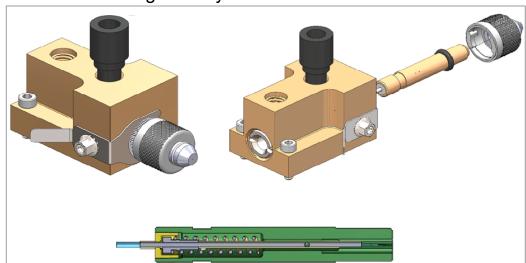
Diagram of the new sprayer assembly incorporating exploded view and a cross section of the new emitter assembly.
